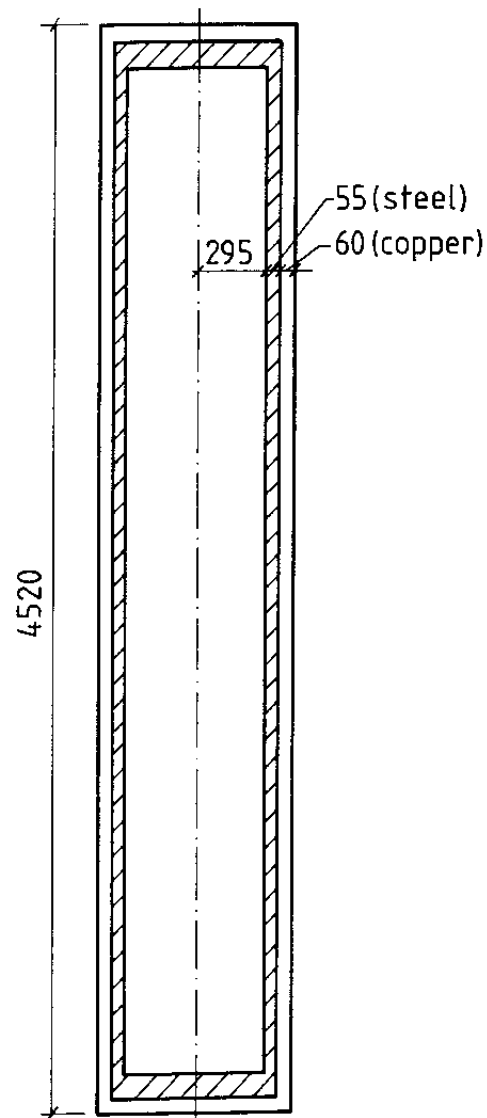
Geometry of the double-walled copper/steel canister (mm)
